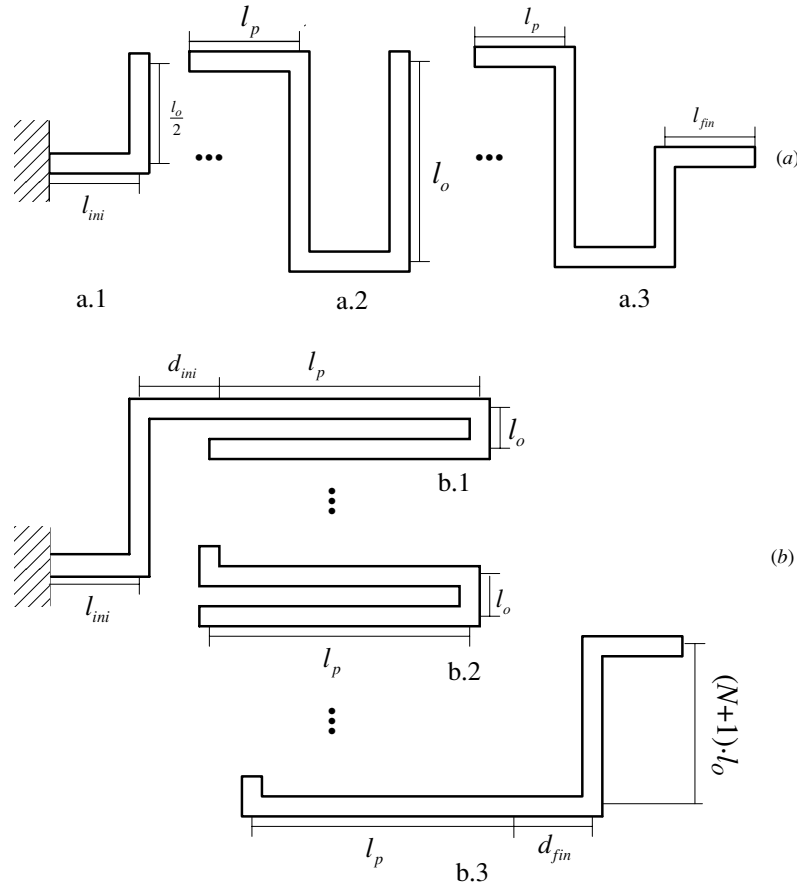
Classic serpentine spring (a); rotated serpentine spring (b).
